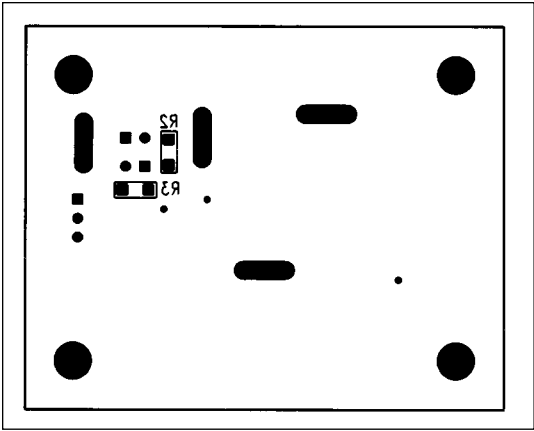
MAX649 EV Kit Component Placement Guide—Solder Side
